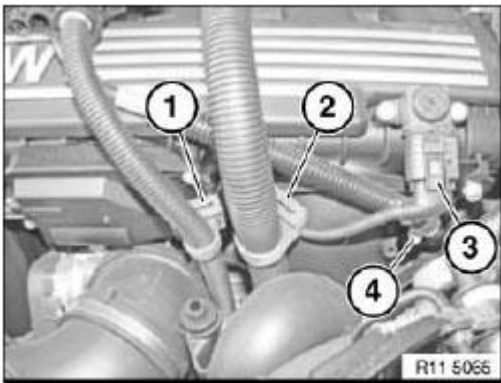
Identifying Rubber Holders, Plug Connection And Unclip Line
